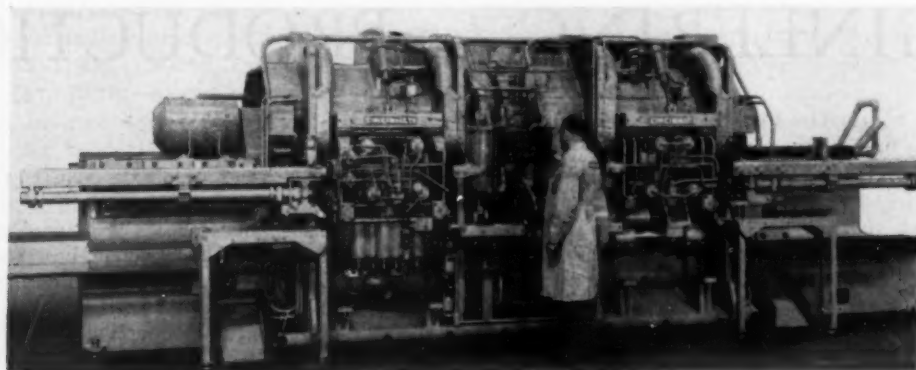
MILL BROACH FOR MACHINING TOP, BOTTOM, MANIFOLD SIDE, AND VALVE-CHAMBER-COVER SIDE ON VALVE-IN-HEAD CYLINDER HEAD
